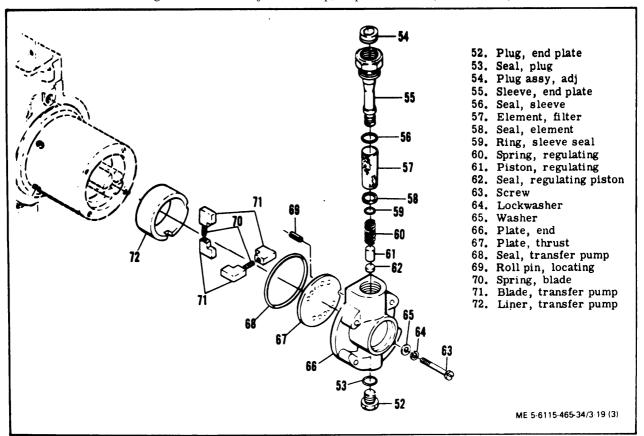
Fuel Injection Pump, Exploded View (Sheet 3 of 7)
